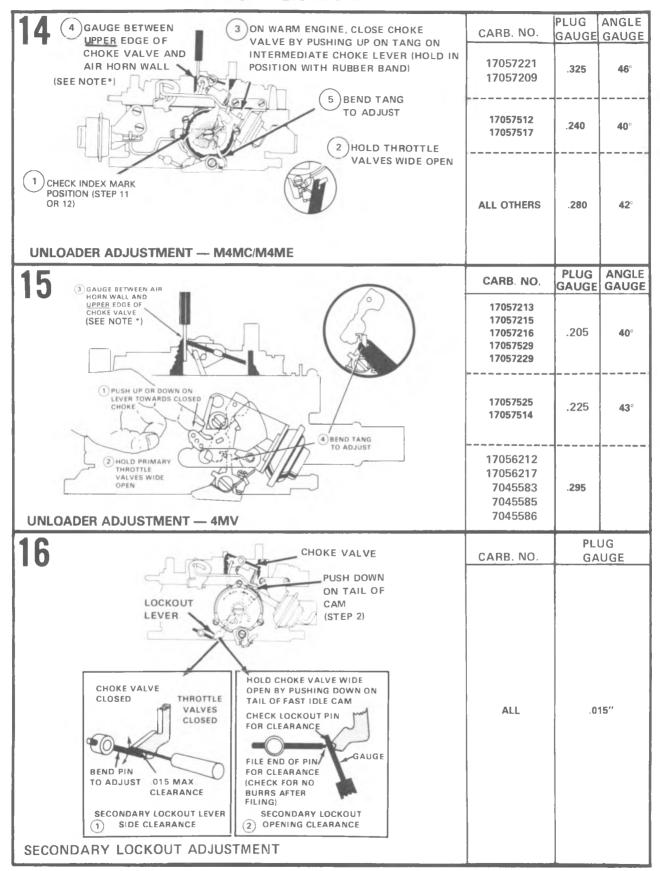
C-52--M4MC/M4ME/4MV Carburetor Adjustments - 6 of 8
